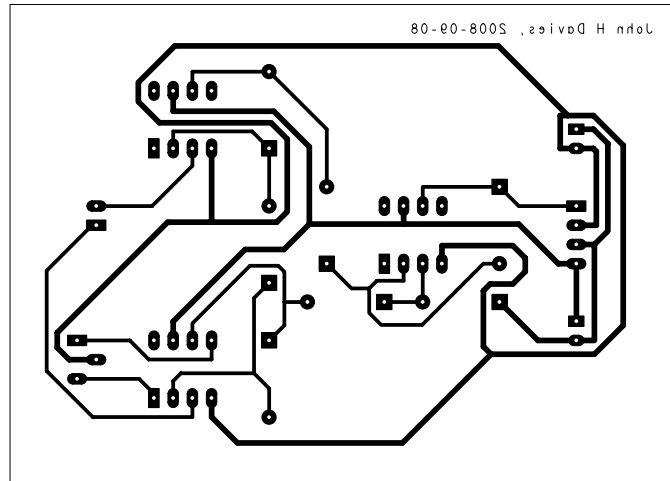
Printout at actual size for manufacturing a single-sided board (bottom layer) with holes in the pads to guide the drill.
